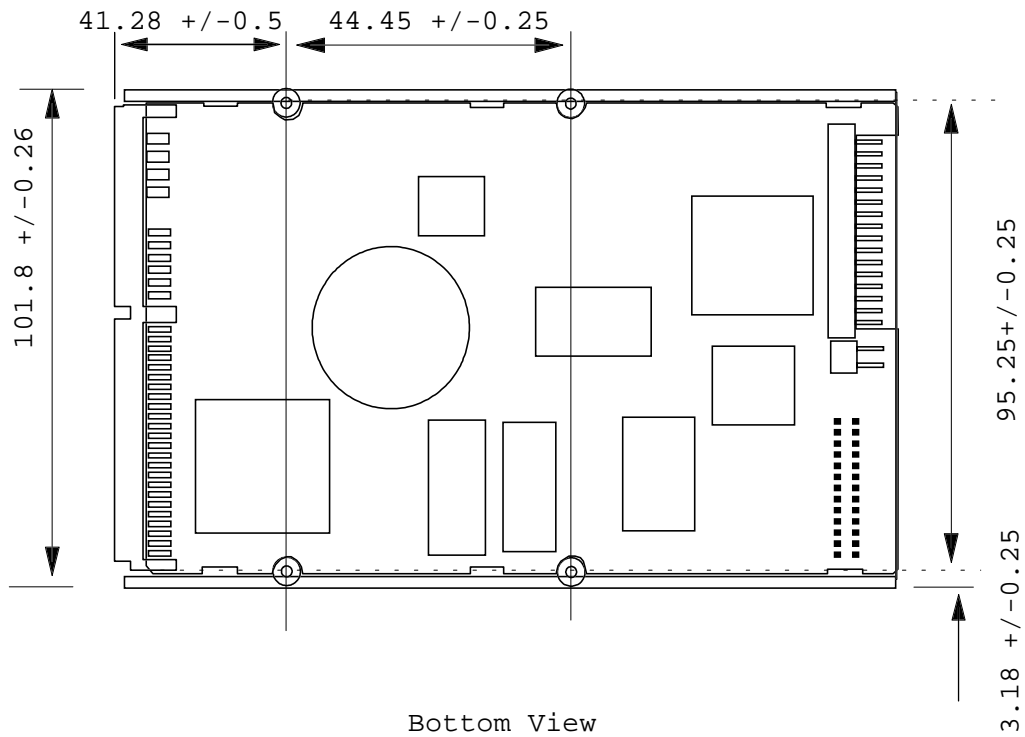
Location of bottom mounting holes (68 pin SCSI version)
